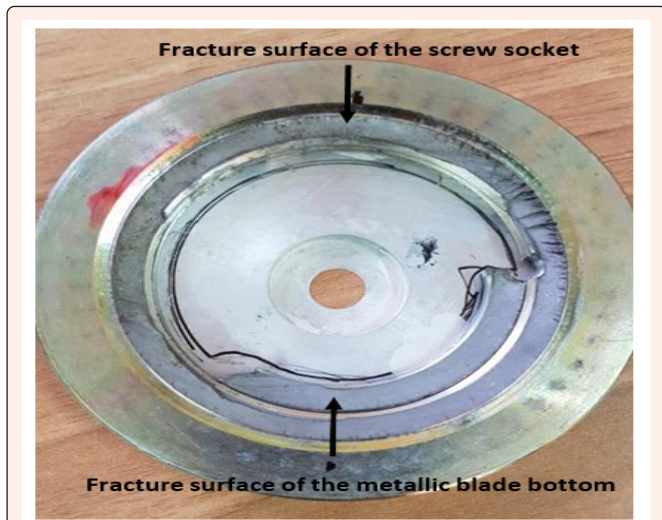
Fracture surface of the screw socket (external zone) and of the part of blade bottom that has been retained by screw during failure (inner zone).
